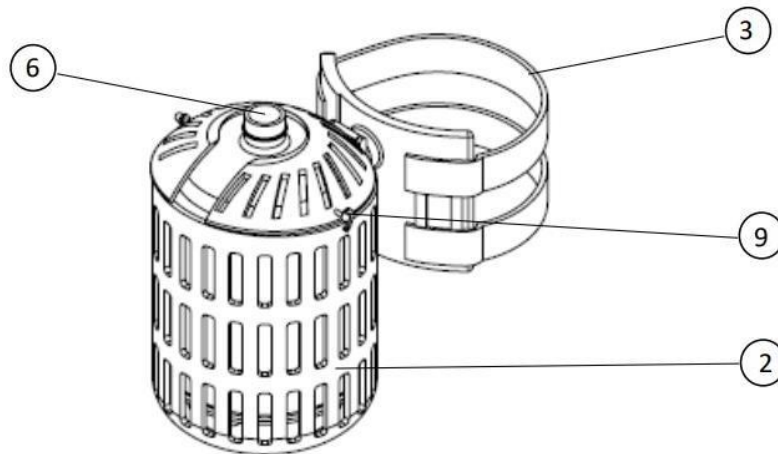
Perspective view of wearable modular chest tube carrying apparatus for lower extremities
